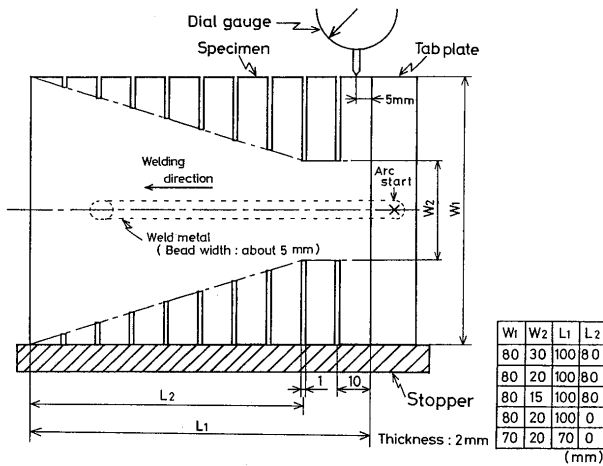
Shape and size of specimen used for Houldcroft-type cracking test
